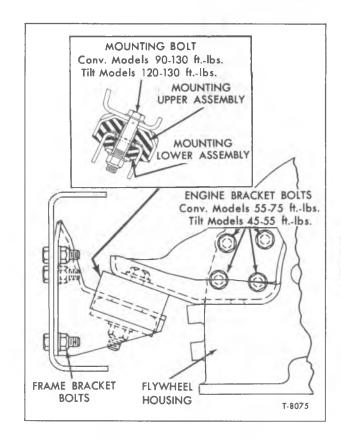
Engine Rear Mounting at Frame Bracket (Typical)
